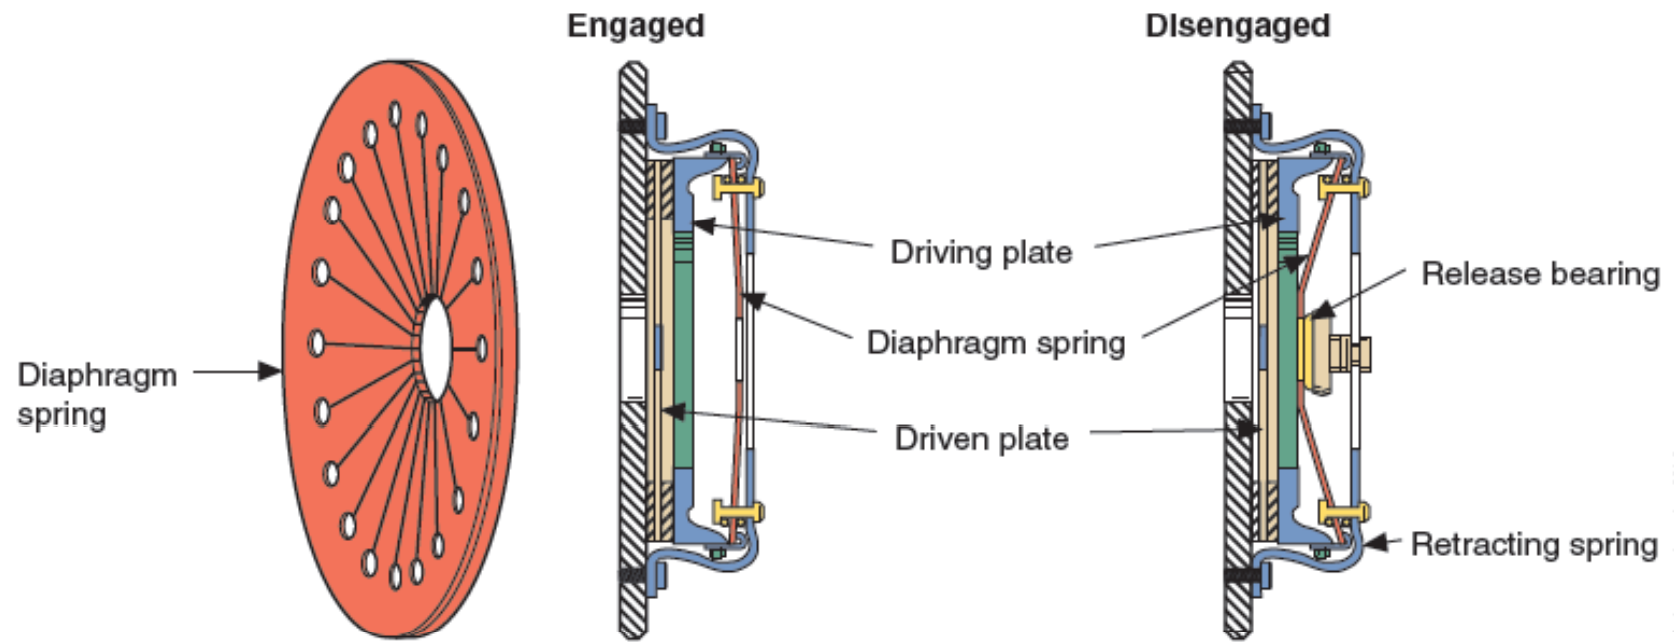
A clutch pressure plate assembly with a diaphragm spring.
